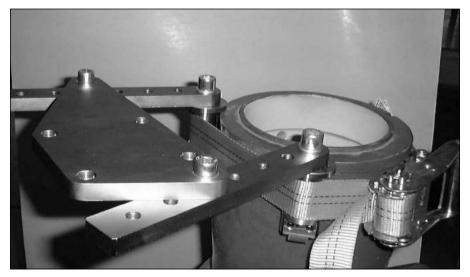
BRACKETS AND BASE PLATE MOUNTED TO THE VALVE (VALVE BODY WITHOUT FLANGE)
